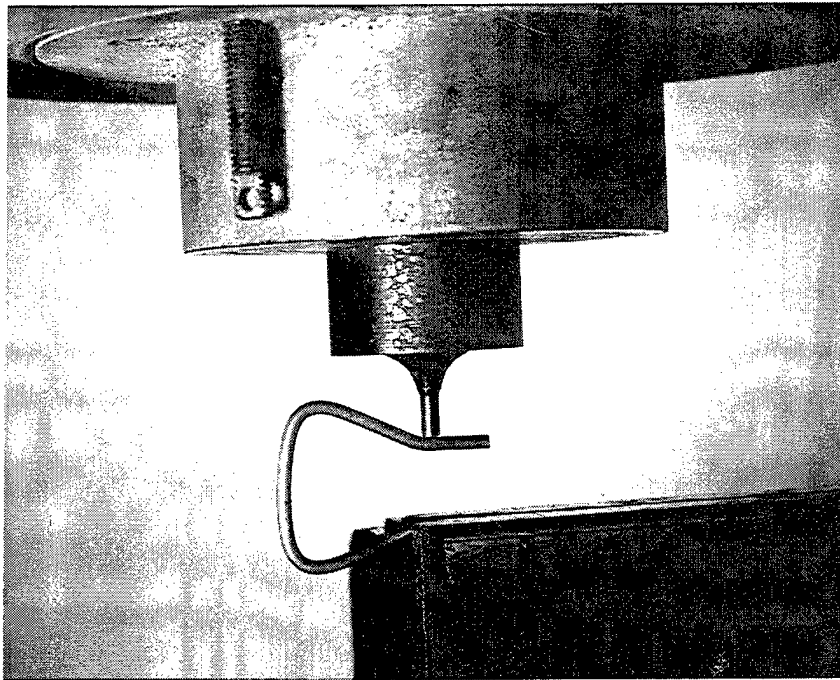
Close-up view of the spring sample prior to the compression test. A small plunger with the small end tip was placed between the compression head of the testing machine and the spring's free end.
